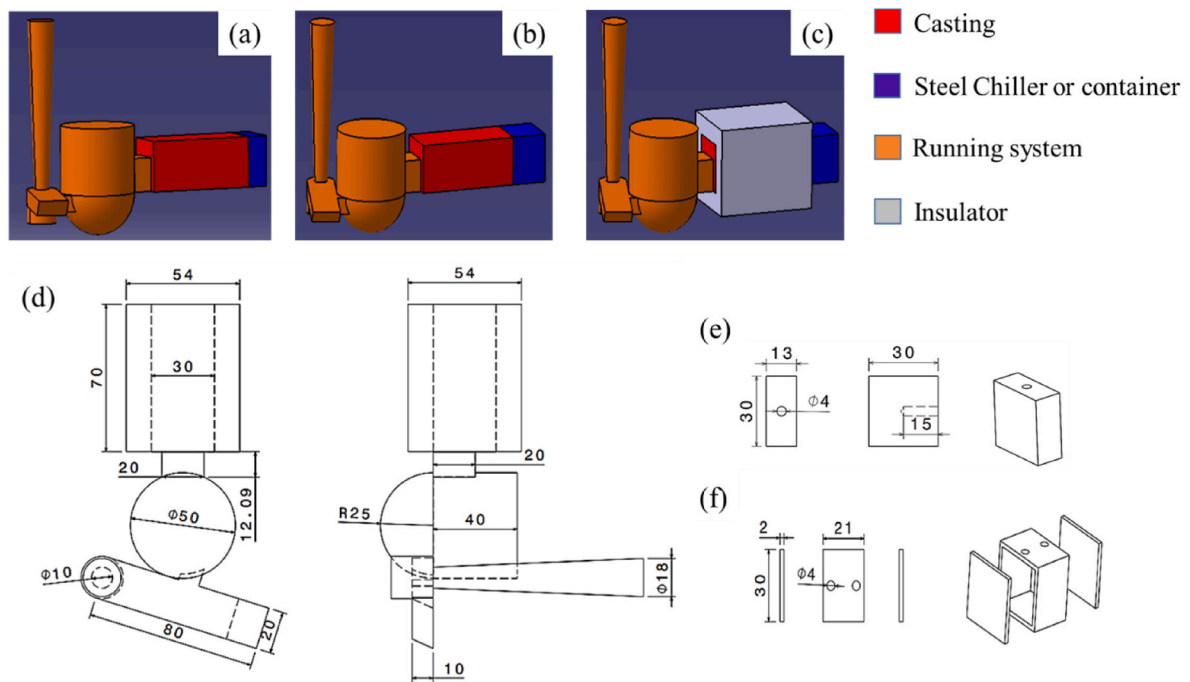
3D schematic of a) Chill casting (insulator removed), b) PCM casting (insulator removed) and c) Chill or PCM casting (insulator shown). Dimensions (mm) of d) casting, running and feeding systems, e) solid steel chiller for Chill casting and f) steel container for PCM casting.
